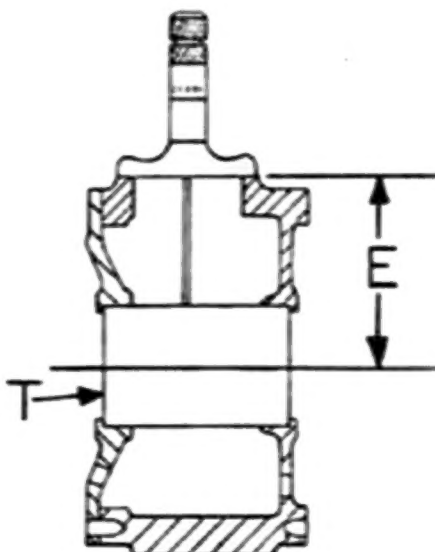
Use depth micrometer to measure distance from face housing to special tool (T). Tool (T) is IH No. 95-97B. Refer to text.
